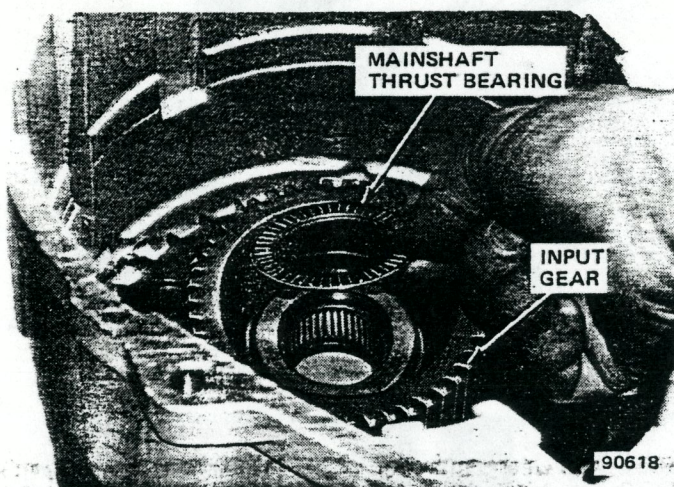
D-23 Mainshaft Thrust Bearing and Input Gear
